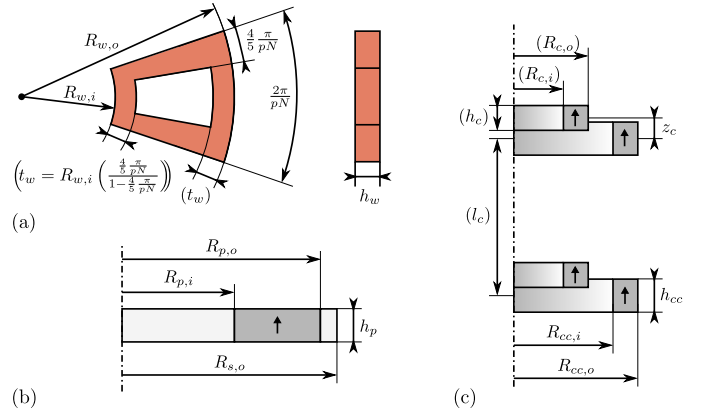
Optimisation variables: machine geometry. (a) Coils. (b) Permanent magnet rotor. (c) Centring bearings.
